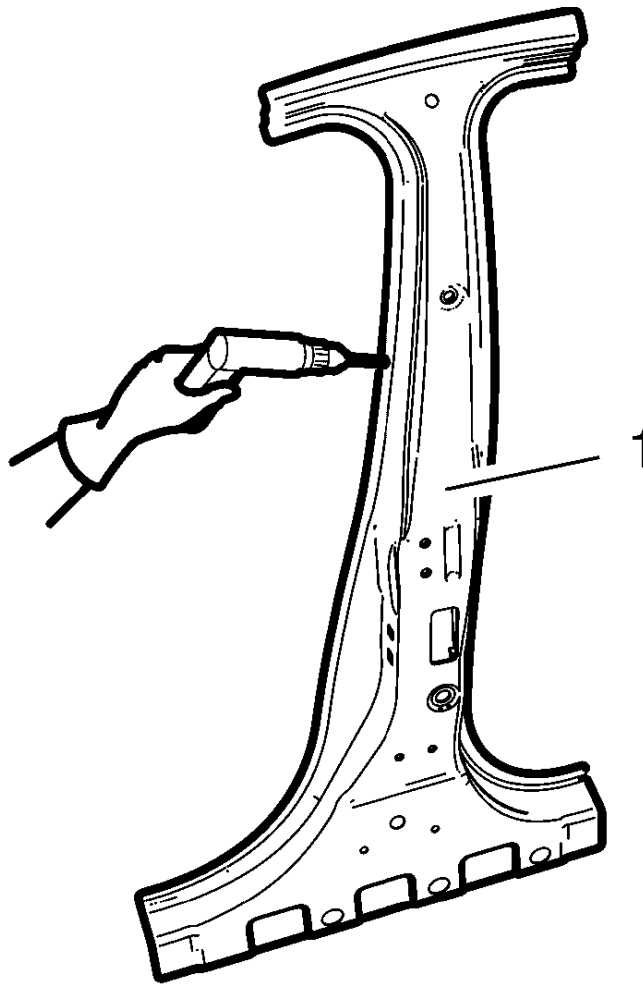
Drilling Plug Weld Holes For New Center Pillar Reinforcement
